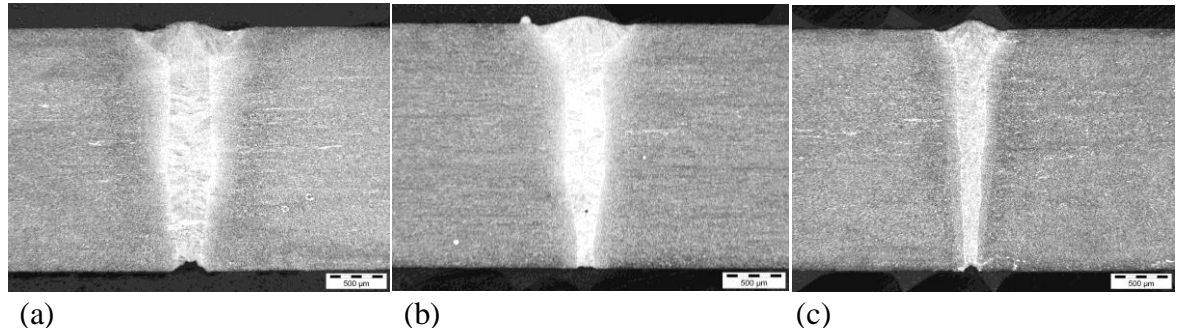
Melt runs produced with the YLS-1000-SM Yb-fibre laser in 2mm thickness Ti-6Al-4V using a 250mm focusing lens, a 0mm focal plane position, and welding speeds of (a) 66.7mm/s, (b) 83.3mm/s, and (c) 133.3mm/s.
